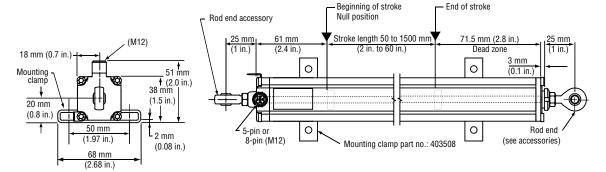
E-Series model ER rod-and cylinder sensor dimension reference
